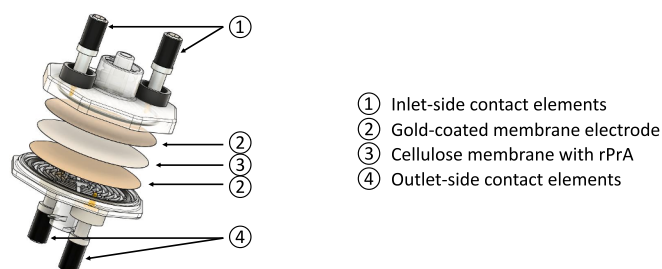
Design of i3 DMC^{PrA} device in an exploded view.
